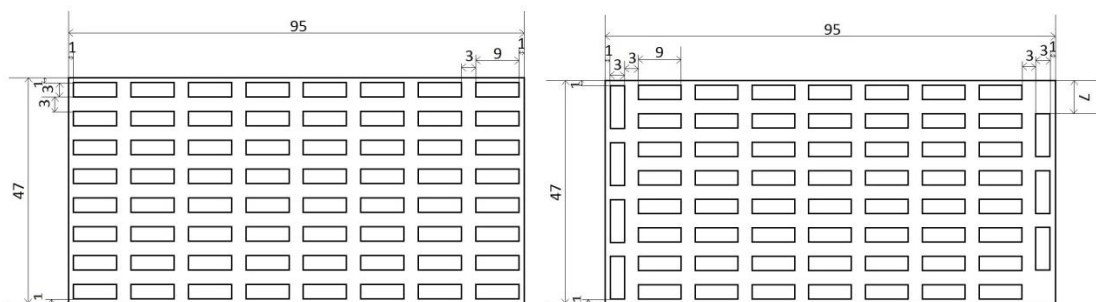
lower end design surface (Unit: mm) Figure 2-26: upper end design surface (Unit: mm)
